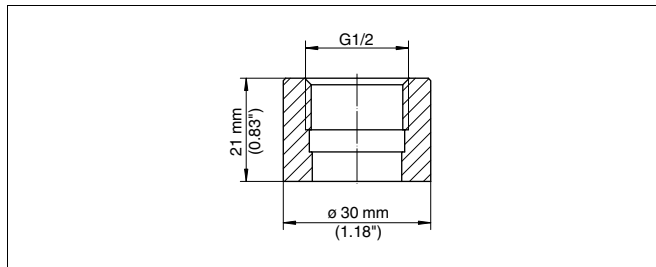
Dimensions welded socket G $\frac{1}{2}$  B acc. to ISO 228-1 - pipeline
